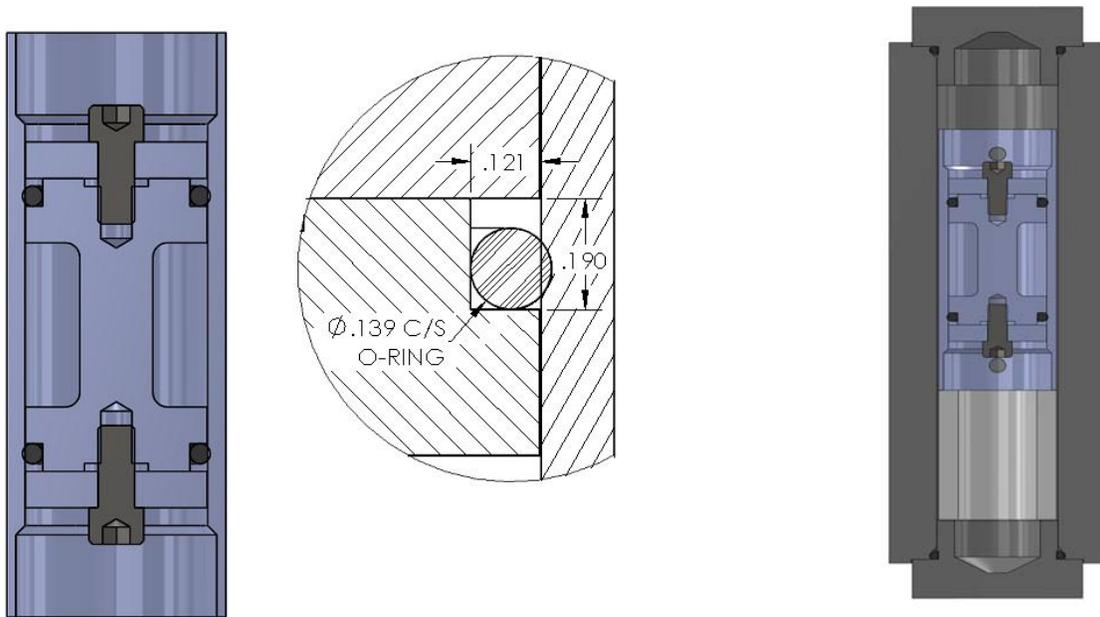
O-ring Mandrel, compression sleeve, and gland; Fig 2 – Complete assembly.
